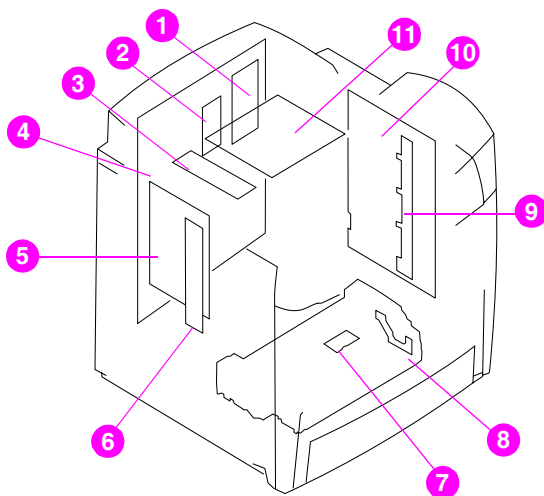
CLJ 5500 location of solenoid and clutch
